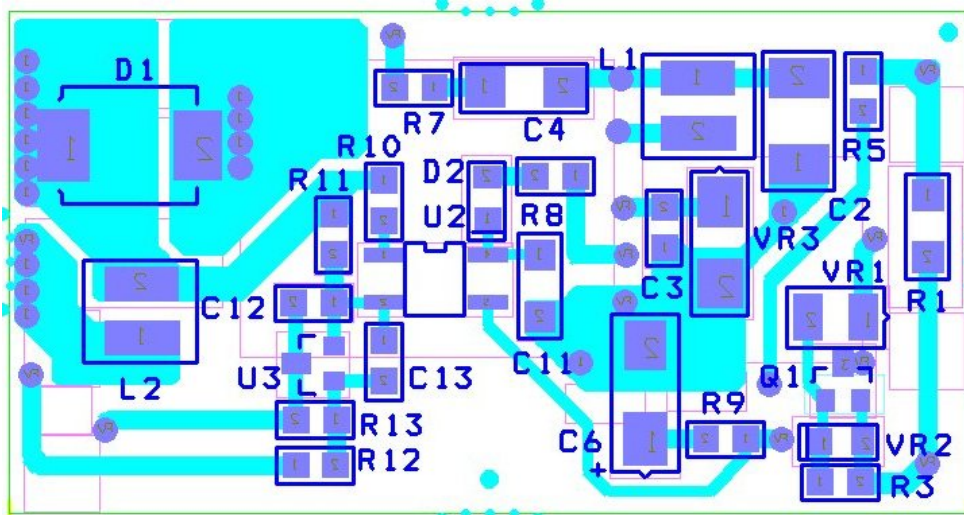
Bottom Side, SMT Printed Circuit Layout (Top View).
